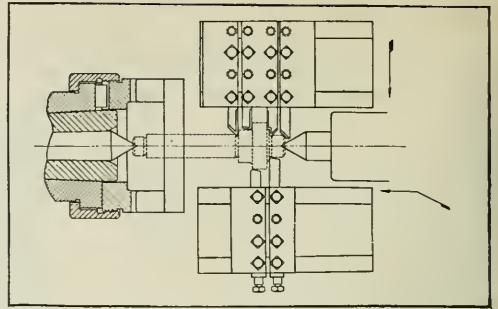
Tooling Equipment provided for the First Operation on a Transmission Shaft
